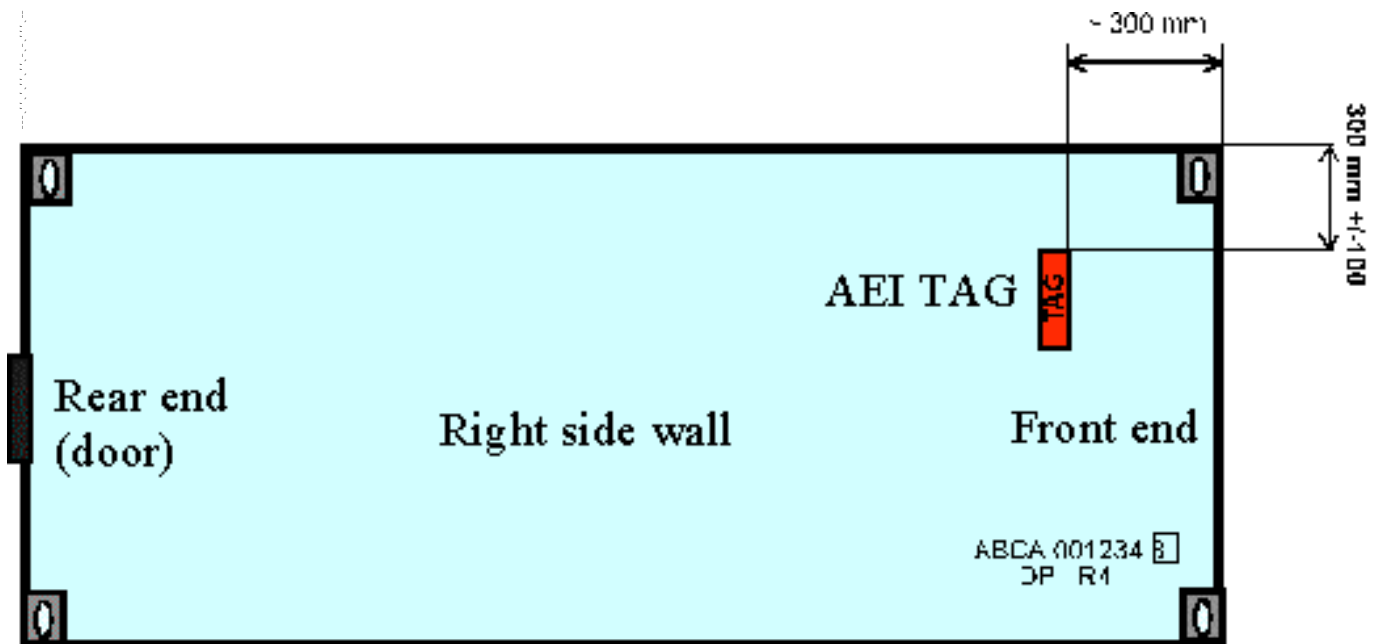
Mounting window on Intermodal Transport units - ISO-Container
